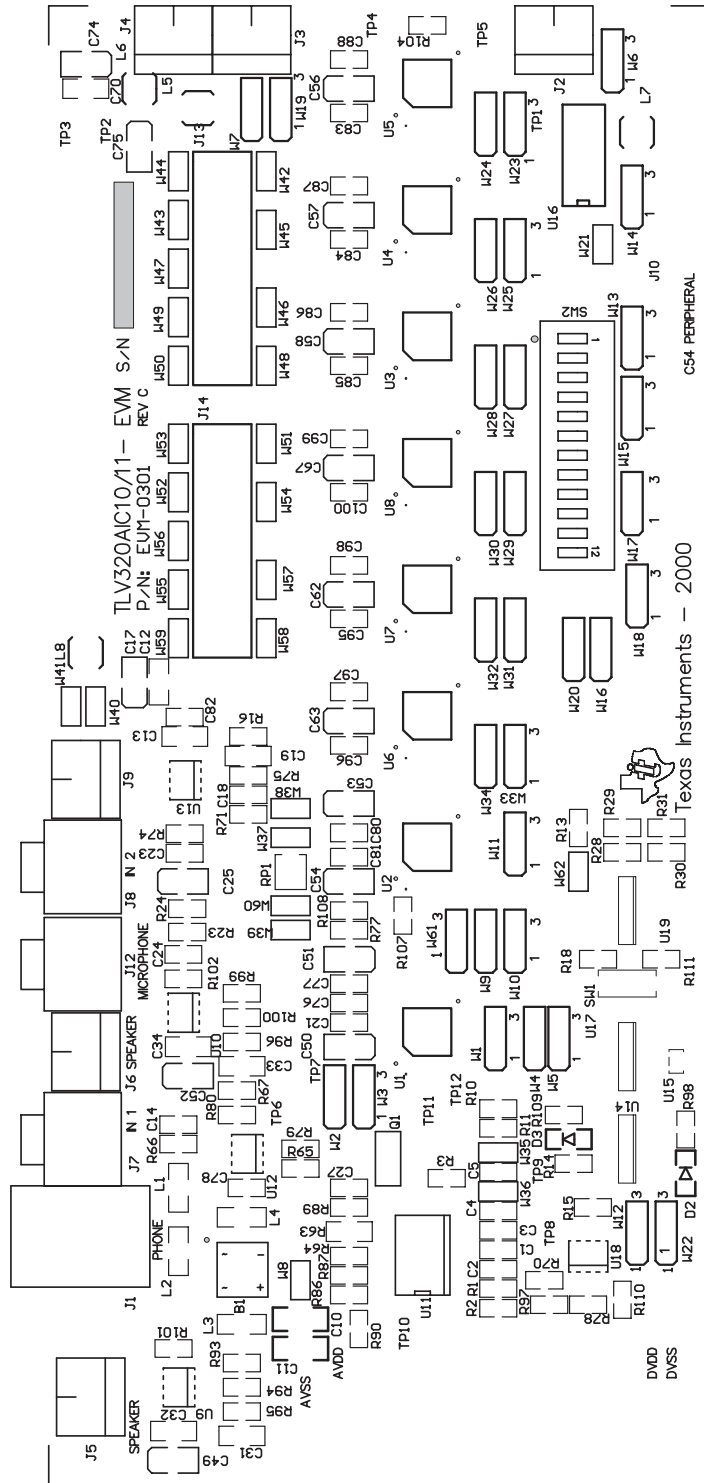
Printed-Circuit Board Layer 2 (Rev. C)
